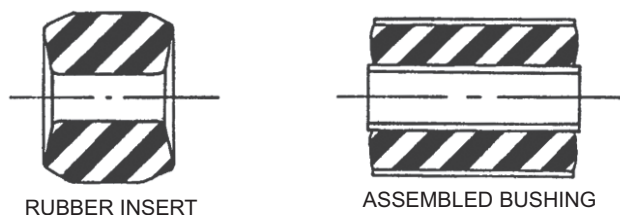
Silentbloc bushing that shows a rubber insert between inner and outer metal sleeves [319]
